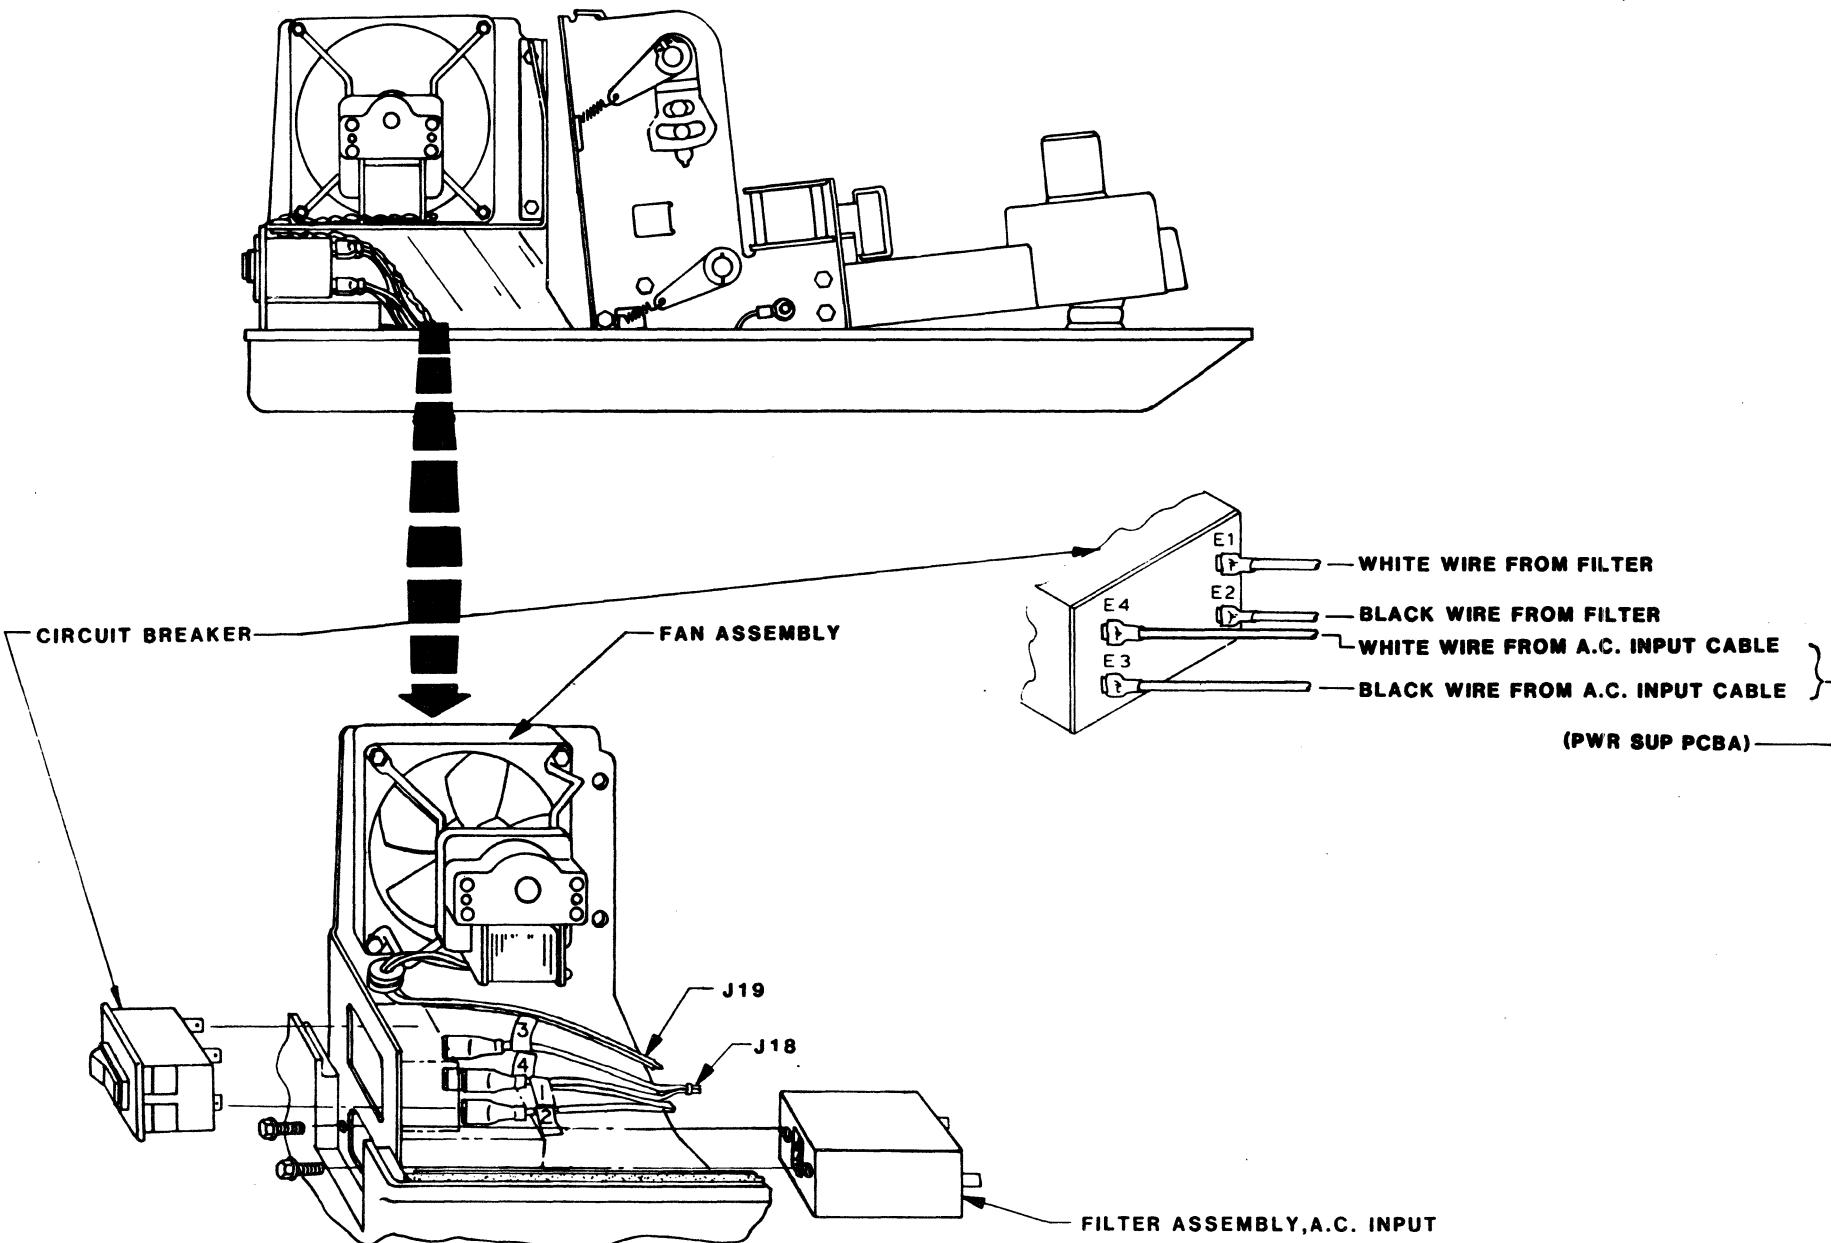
Fan Assembly, Filter Assembly, and Circuit Breaker Removal
